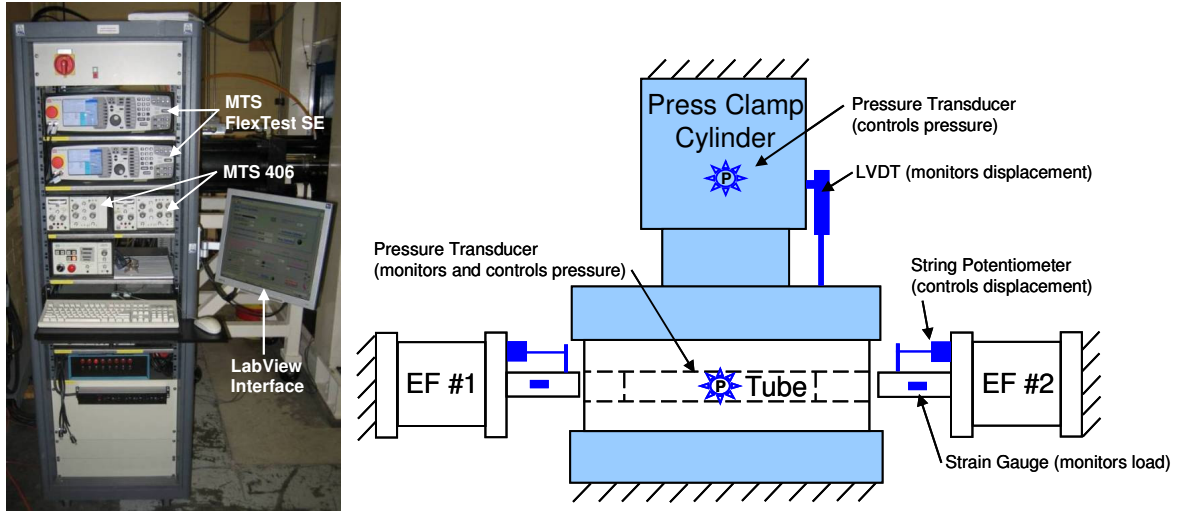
University of Waterloo laboratory hydroforming press and end-feed actuators
